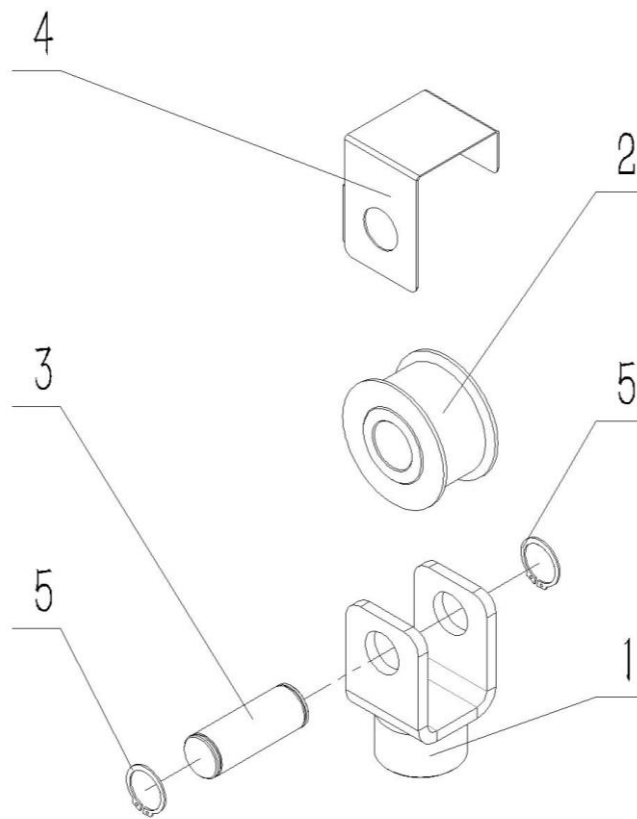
LTPF12 hoist sprocket frame disassembly diagram
